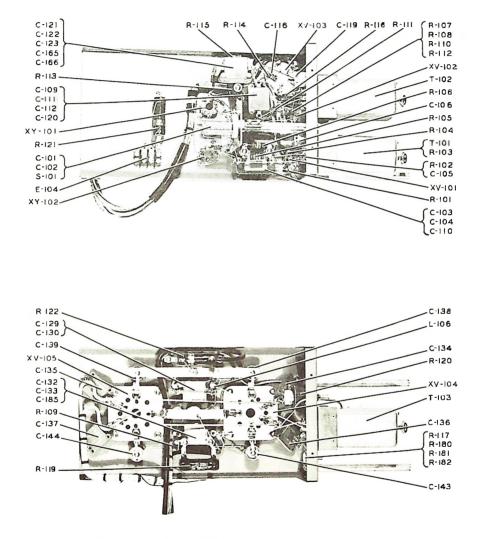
Driver Cabinet R-F Chassis, Bottom View
